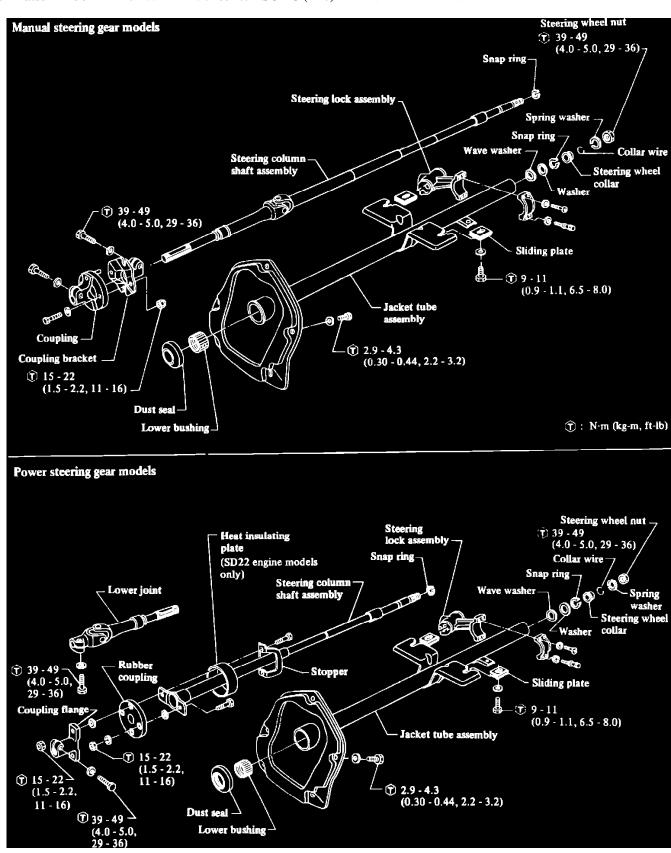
Exploded view of steering column. 1982-86 Pickup less tilt column
